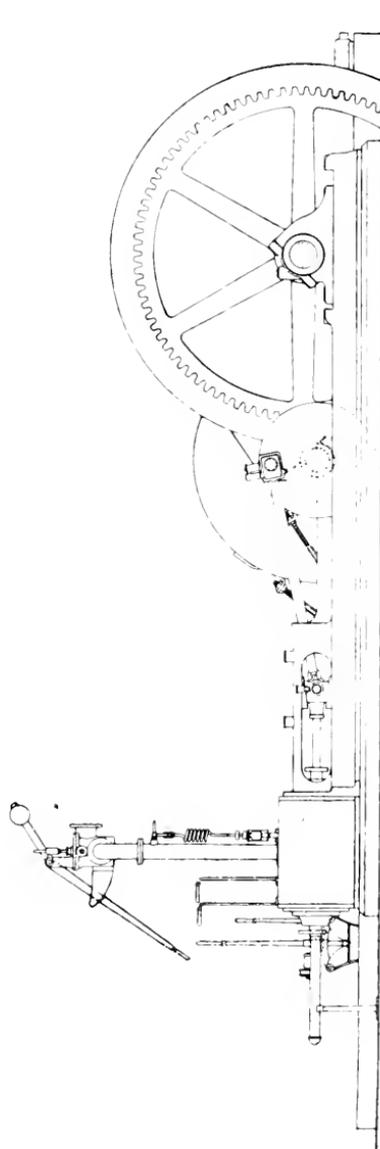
SIDE ELEVATION OF 35 H.-P. COUPLED GEARED WINDING ENGINES FITTED WITH TWO LOOSE DRUMS.
